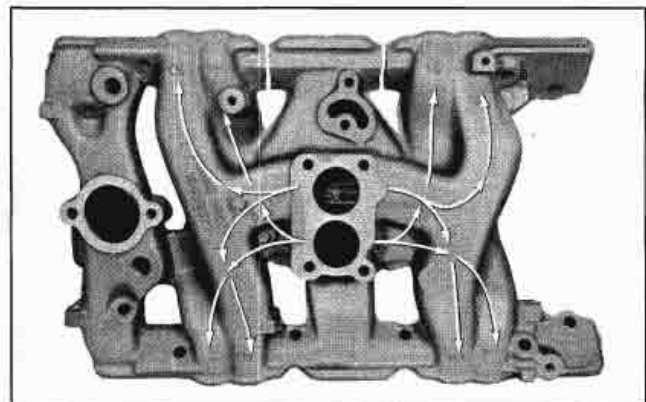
Intake Manifold—Two Barrel Carburetor
